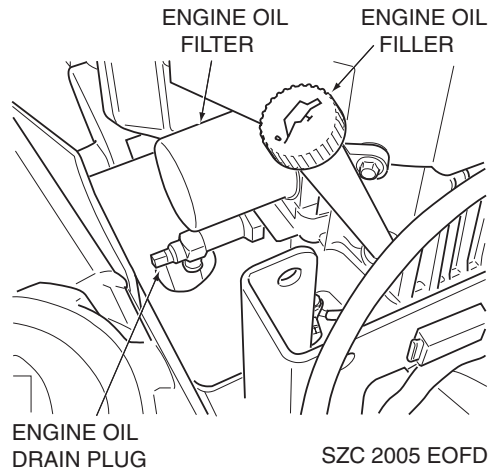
Kawasaki Engine Oil Fill/Dipstick, Filter and Drain Plug Locations
